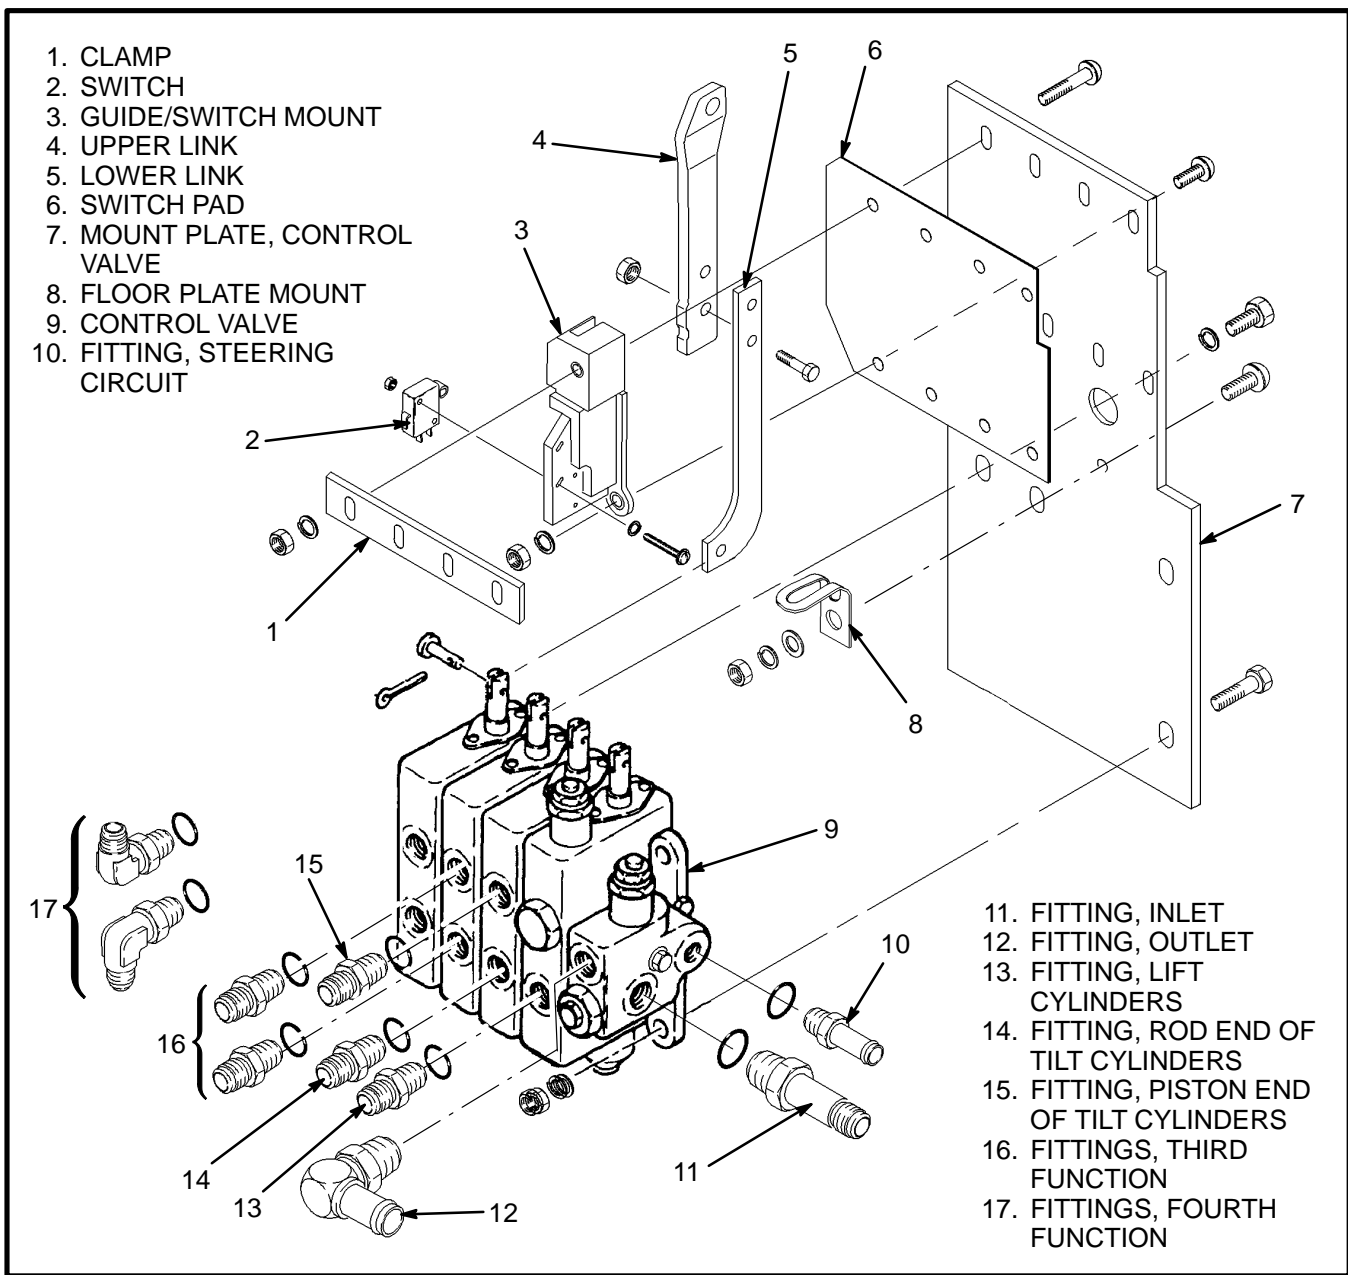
CONTROL VALVE MOUNTING, E1.50-3.20XM (E25-65XM)
